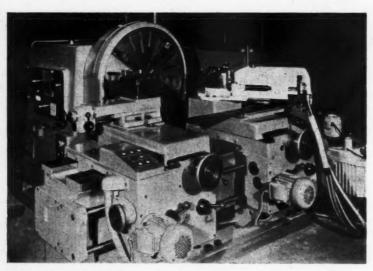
This Zerbst facing lathe is the second smallest of a range of four sizes. It is seen with a hydraulically-operated copying slide mounted on the tool slide at the right
